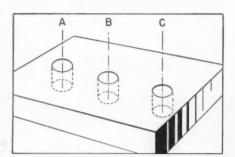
In grinding three holes to size, A and B are roughed to within .001"—.002", and C within about .005". Using a freshly charged mandrel, C is finished to size, thereby breaking down the high points on the tool. A and B may now be safely ground to size.
